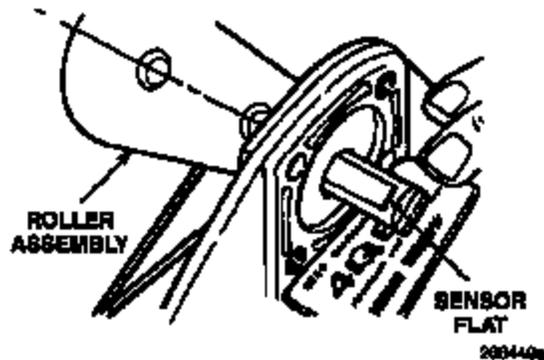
Sensor Shaft Flats Perpendicular to Roller Arm
